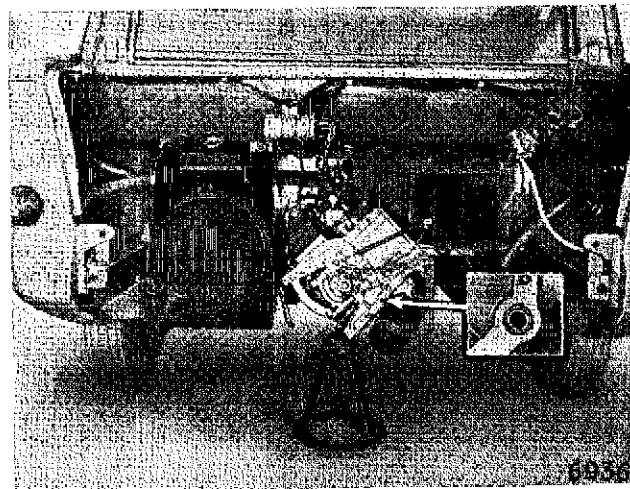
Timing cover removed showing oil passage rubber seafing ring in position
